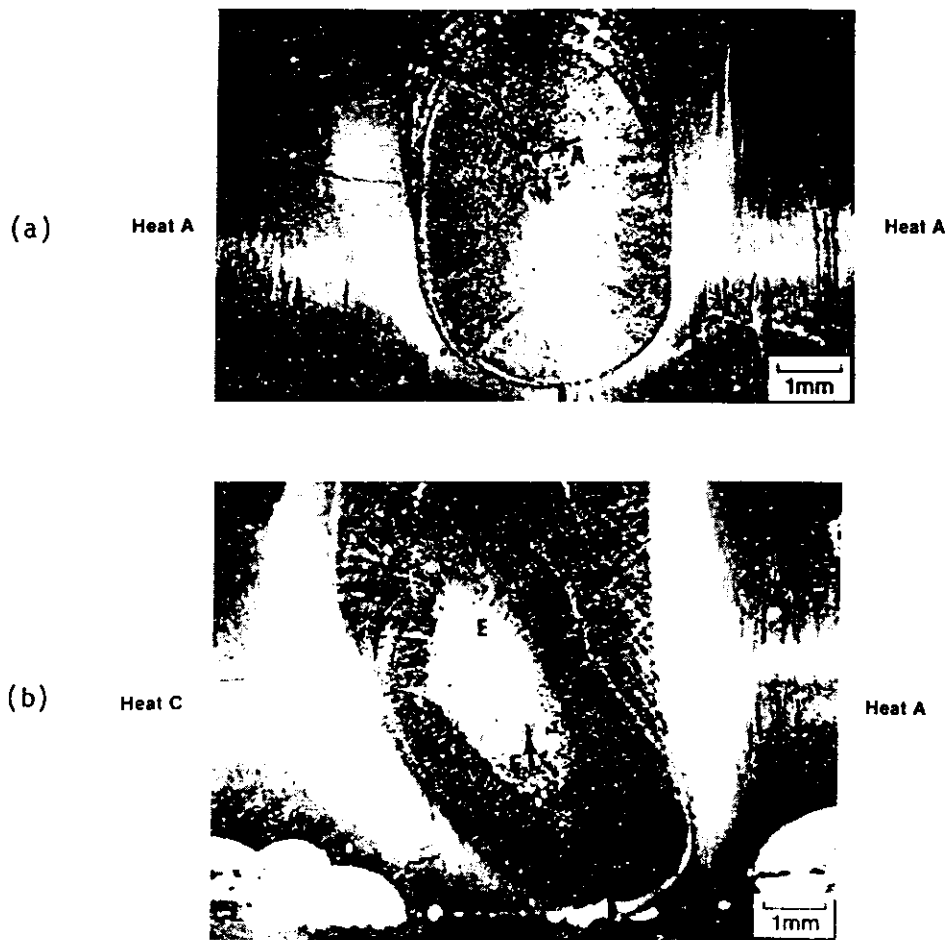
Weld pool shape when joining a) similar materials, and b) dissimilar materials.
